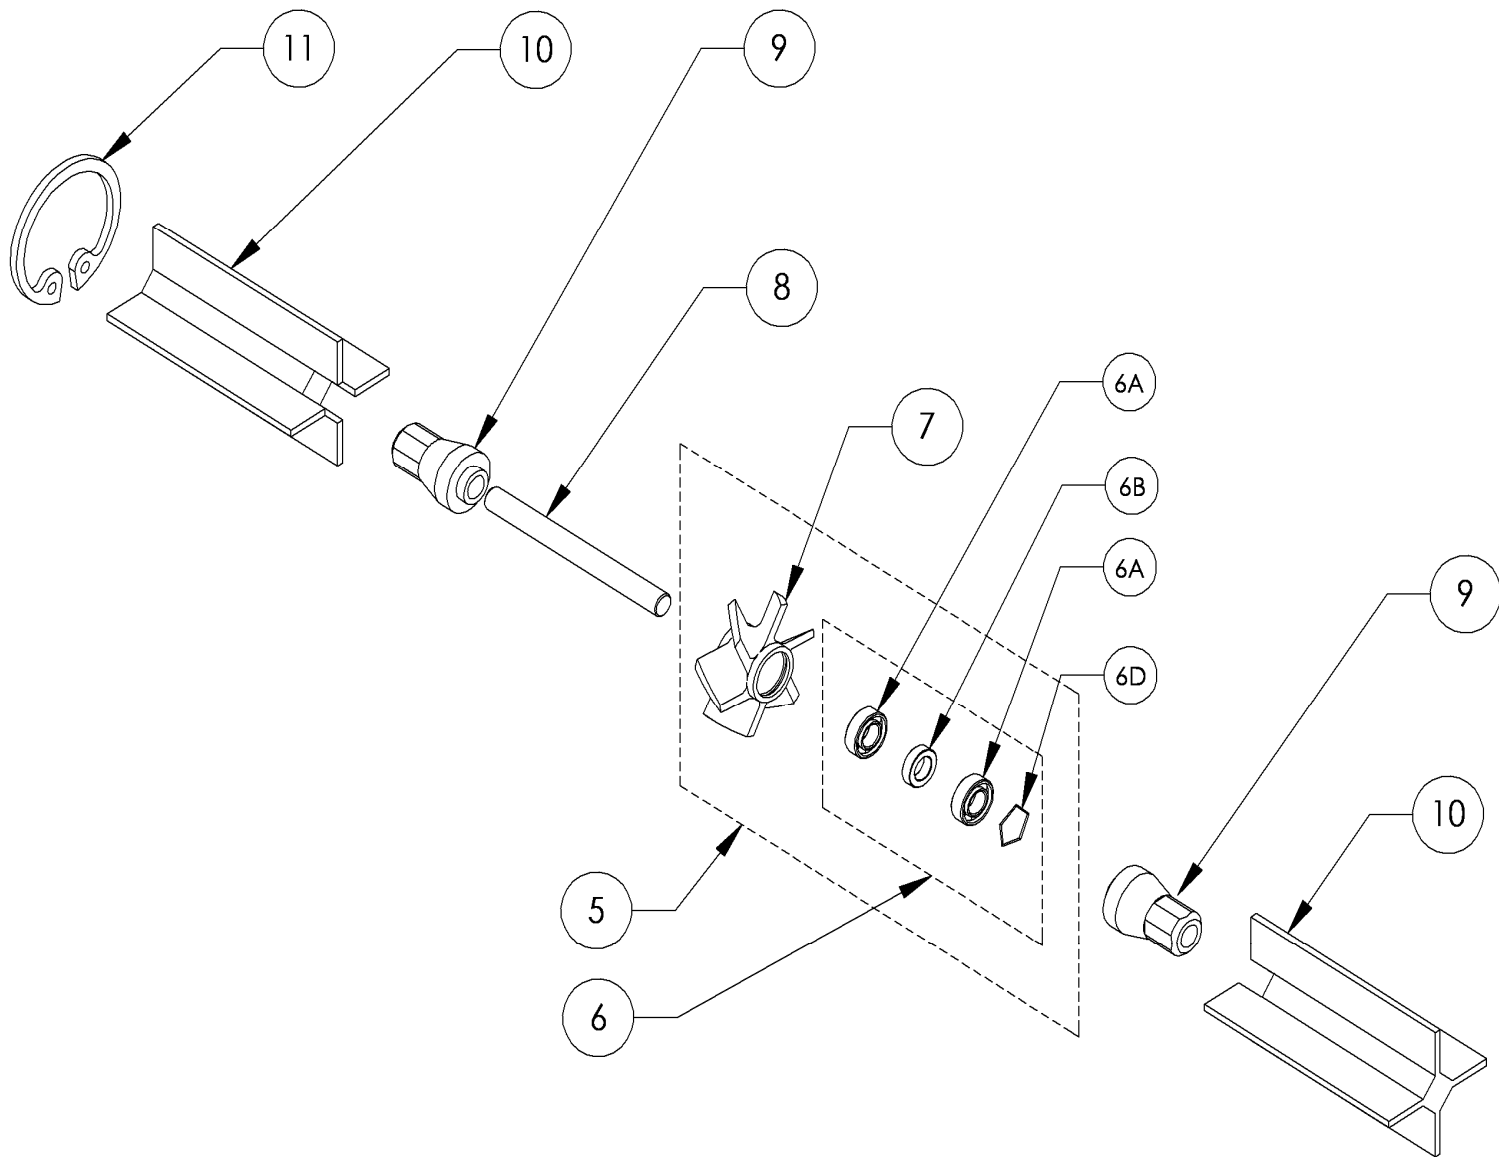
HS-10 thru HS-24 Ball Bearing Internal Assembly (Bearing Code A)
